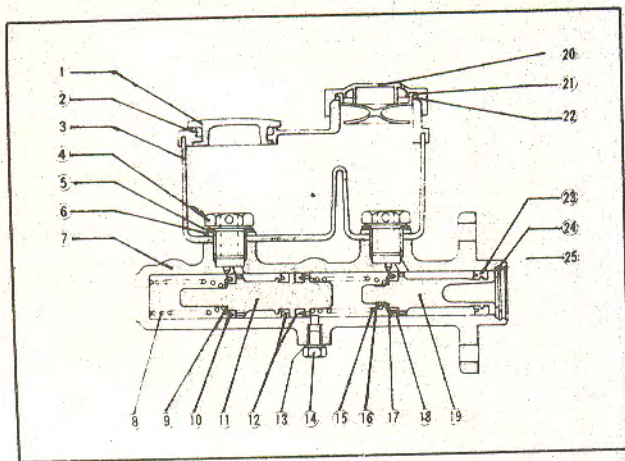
Sectional view of the dual-line master brake cylinder. This cylinder is fitted to right-hand drive models.
